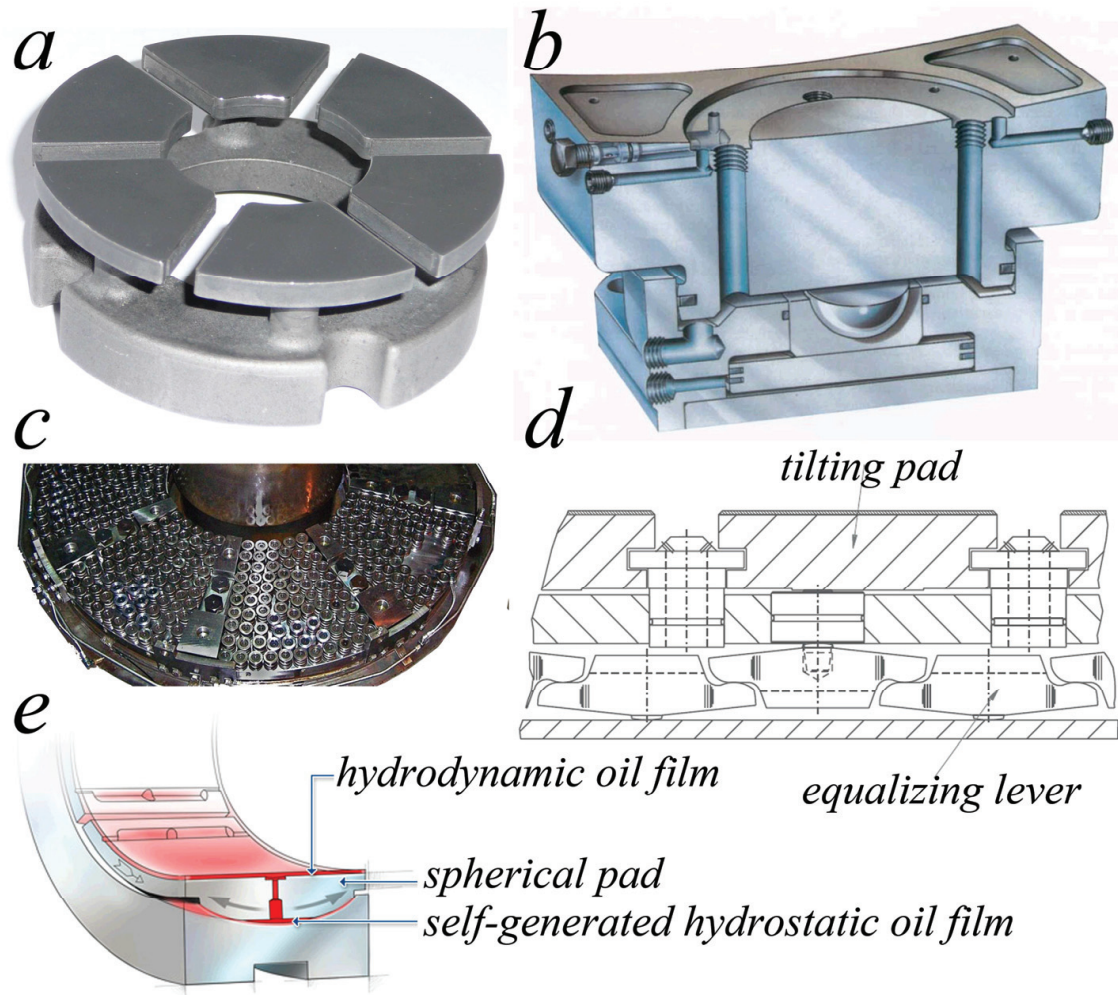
Alternative pivot mechanisms. a: Flexure bearing for small pump application [Grundfos]. b: Advanced hydrostatic tilting pad using ball-in-socket pivot mechanism and hydraulic load equalization for large ball mill [SKF]. c: Spring bed support for hydro power plant. d: Mechanical equalization using lever arms [Waukesha Bearings]. e: Fluid pivot using self-generated hydrostatic oil film [Pioneer Motor Bearing].
